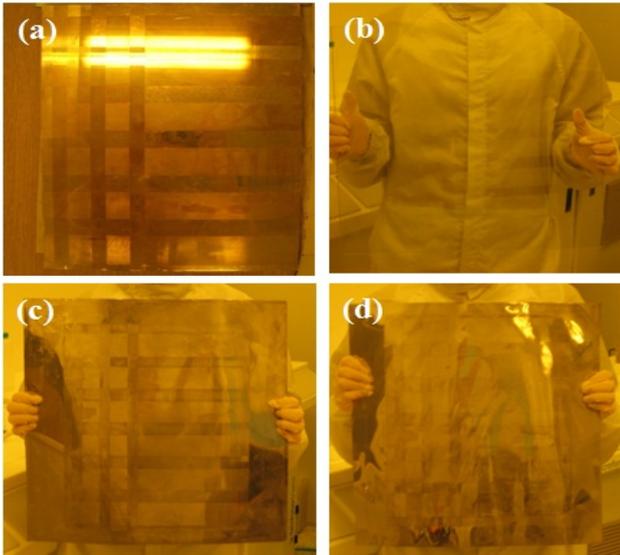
Photography of (a) micro-machined brass master, (b) UV imprinted polymeric master, (c) electroformed nickel mother stamp, (d) electroformed nickel son stamp
